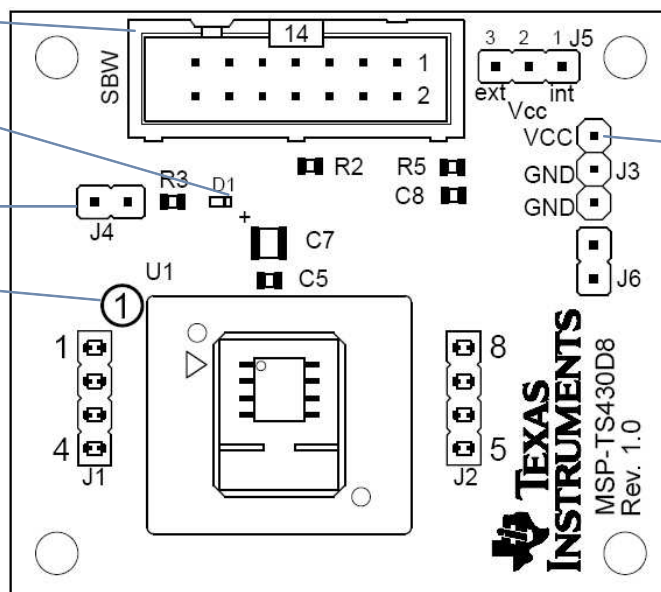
MSP-TS430D8 Target Socket Module, PCB
